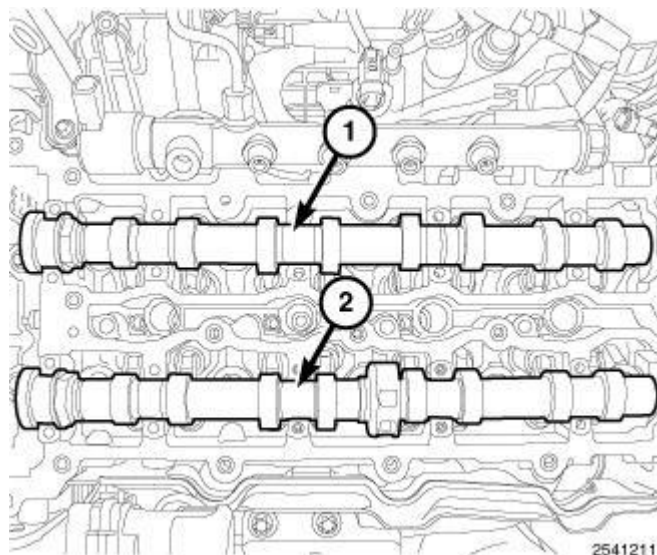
Mark And Number Camshaft Caps & Cylinder Head
